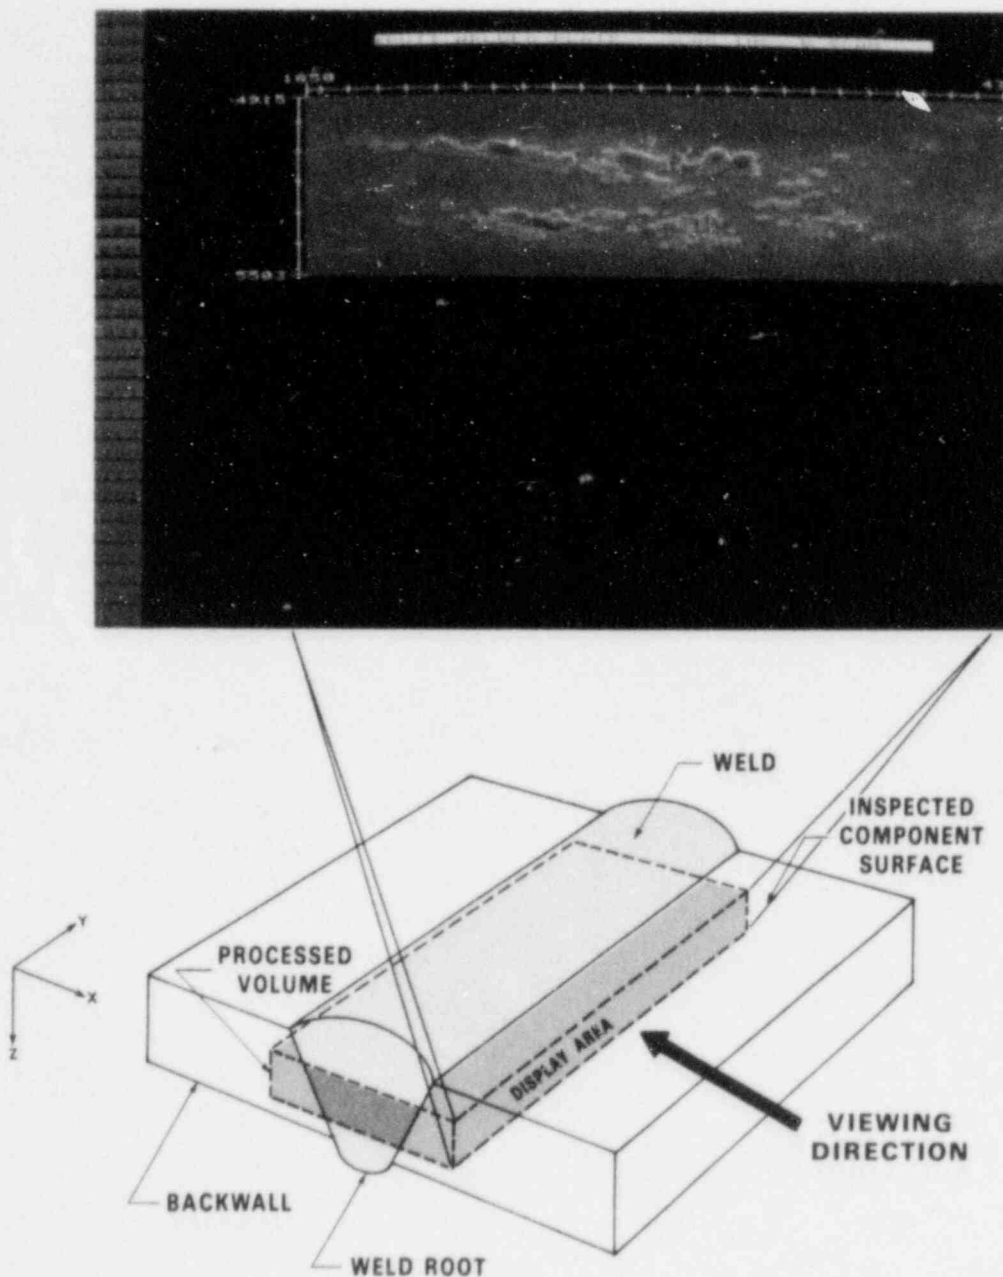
BUTT-WELDED CARBON STEEL PLATE SPECIMEN - SLAG INCLUSION
